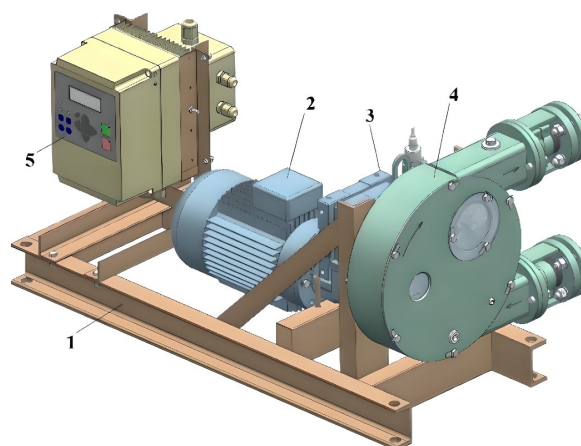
PPU design: 1- frame, 2- electric motor, 3- mount, 4- peristaltic pump, 5- control panel
